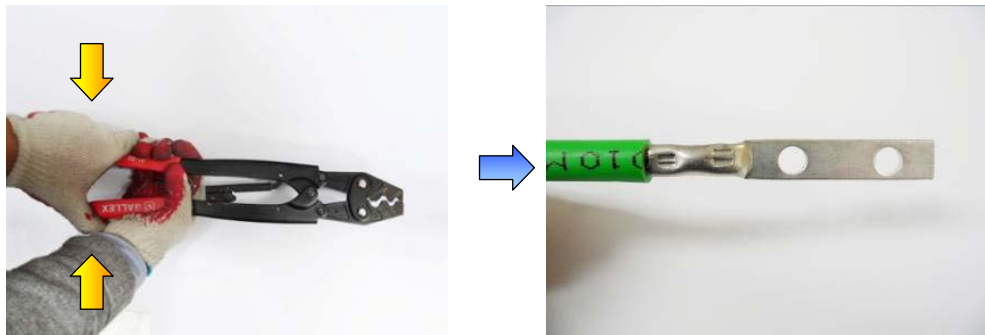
Fixing Pressure Terminal_Handheld Compressor (2)
